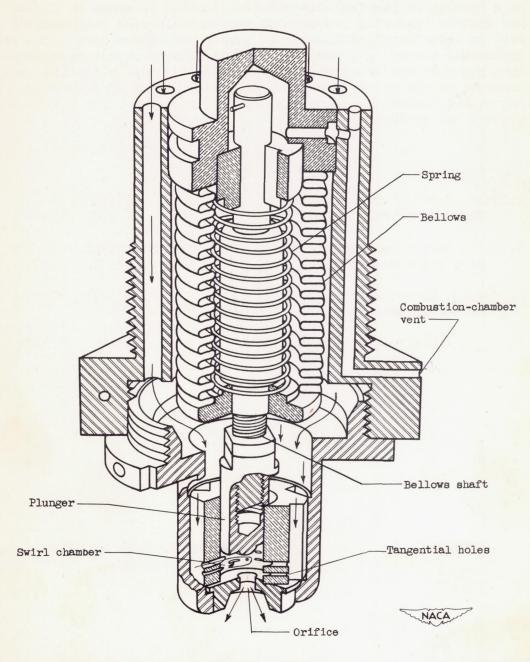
Cutaway drawing of experimental variable-area fuel nozzle for gas-turbine engine.
